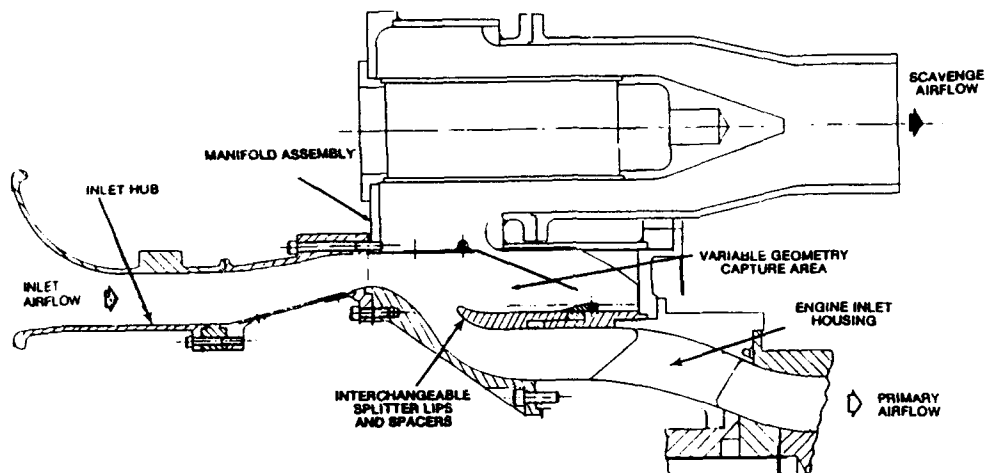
5 lb/s IPS Technology Demonstrator Test Rig
